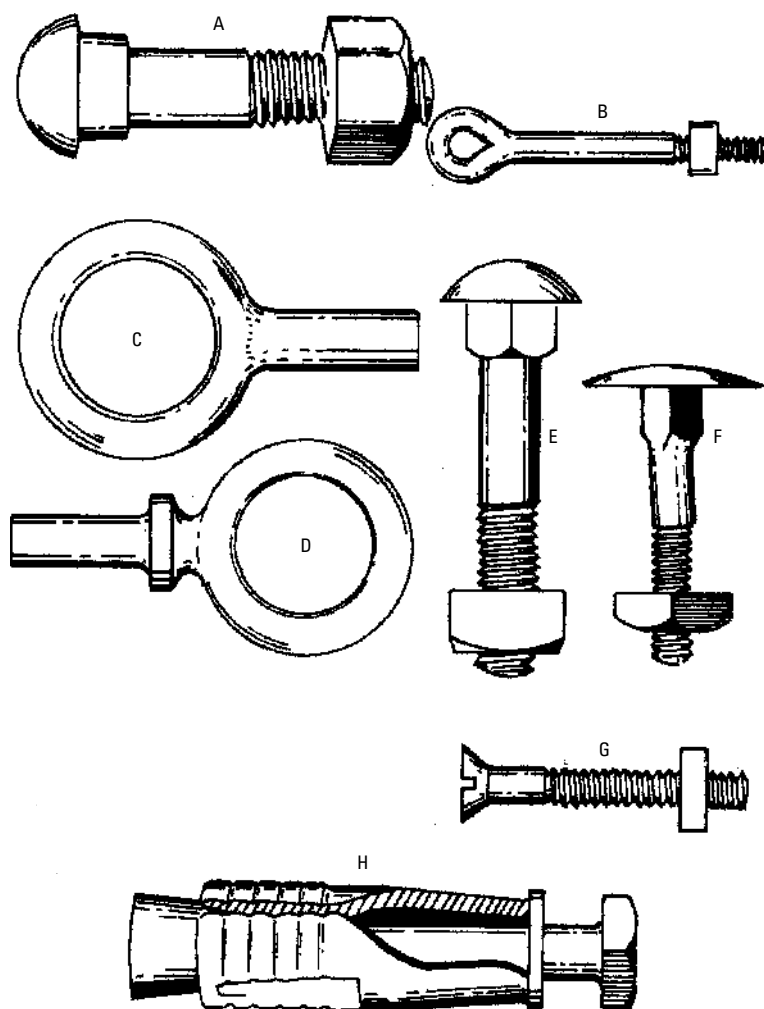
Various bolts. In the figure, (A) is a railroad track bolt, (B) a welded eye bolt, (C) a plain forged eye bolt, (D) a shouldered eye bolt, (E) a carriage bolt, (F) a step bolt, (G) a stove bolt, and (H) an expansion bolt.
